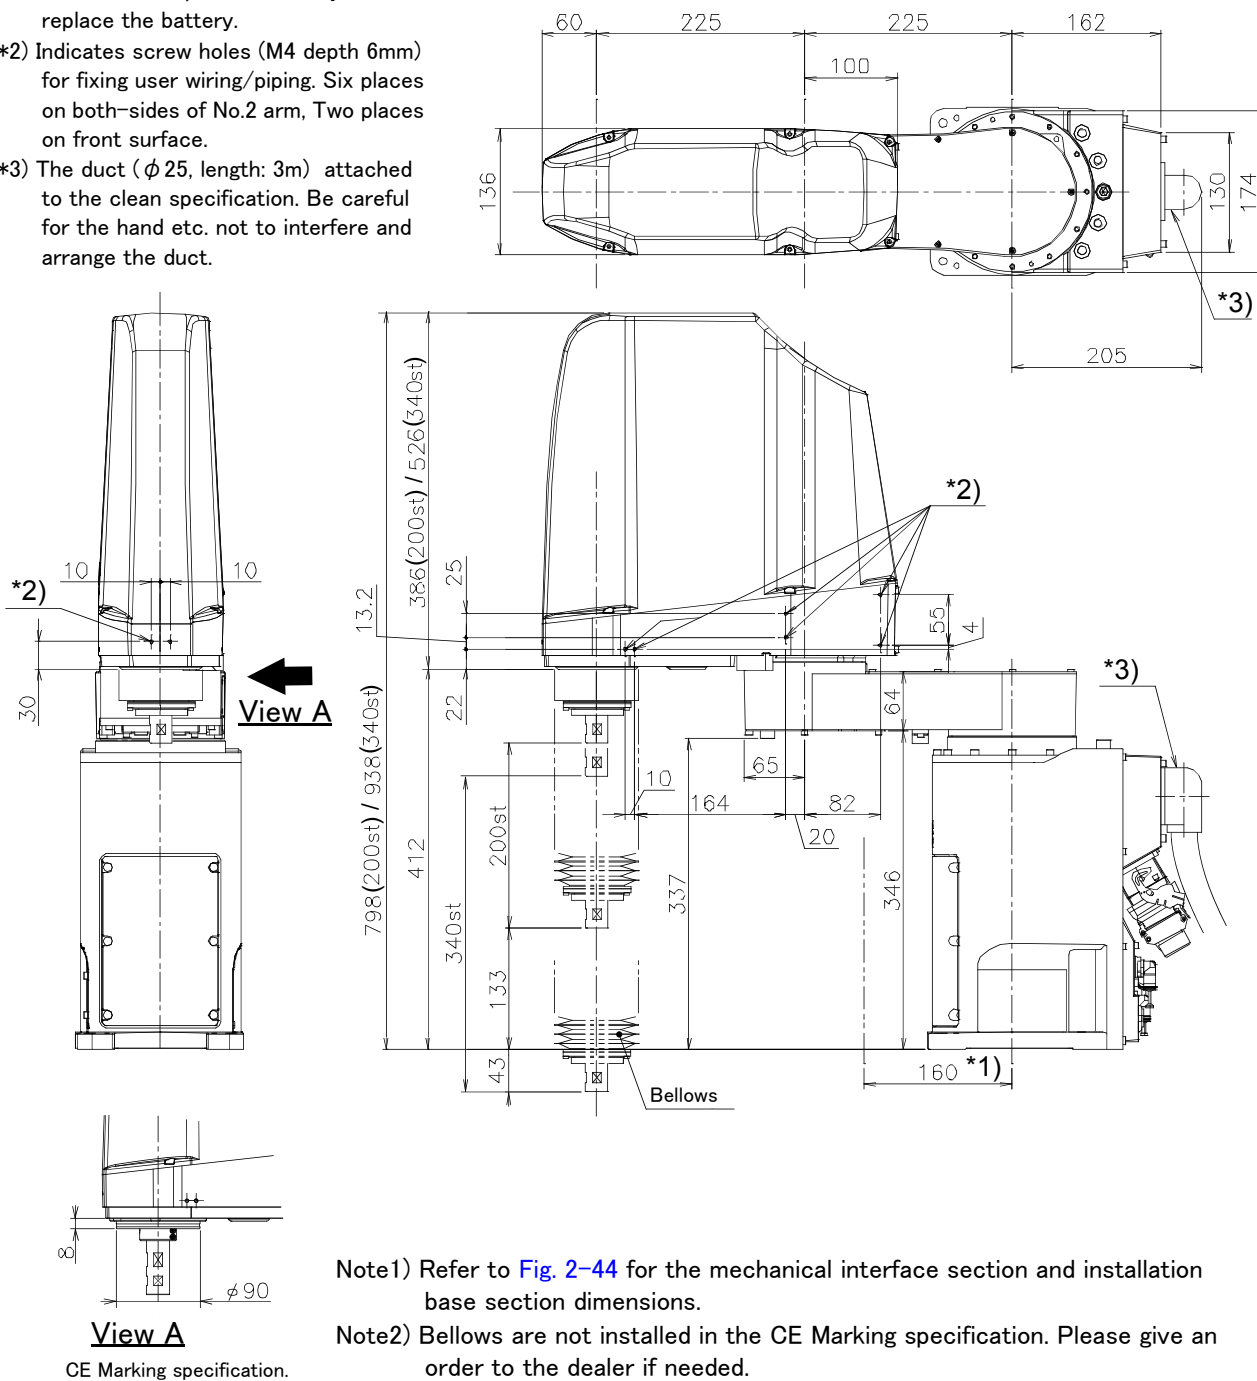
Outside dimensions of RH-6FH45xxC/M
